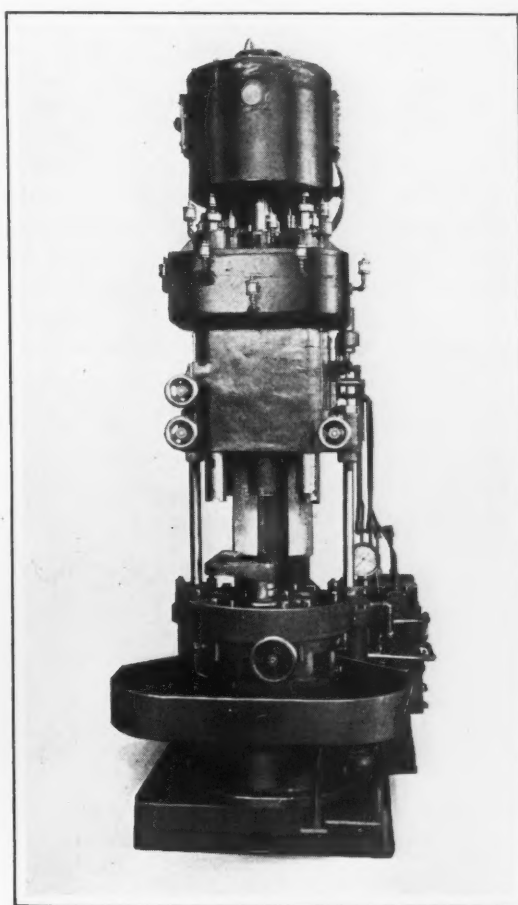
"Twin Pull" Five-spindle Drilling and Boring Machine
